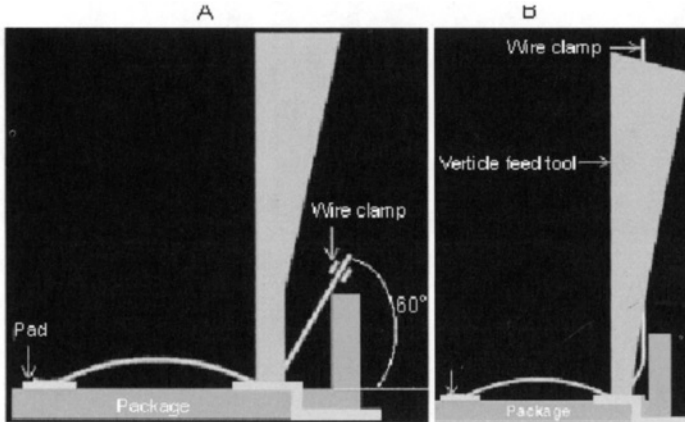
(a) Conventional wedge tool (b) Advanced deep access wedge tool
